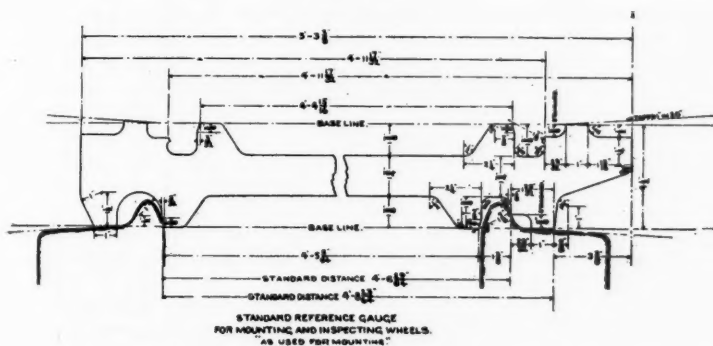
Use of Standard Reference Gage for Mounting Wheels.
